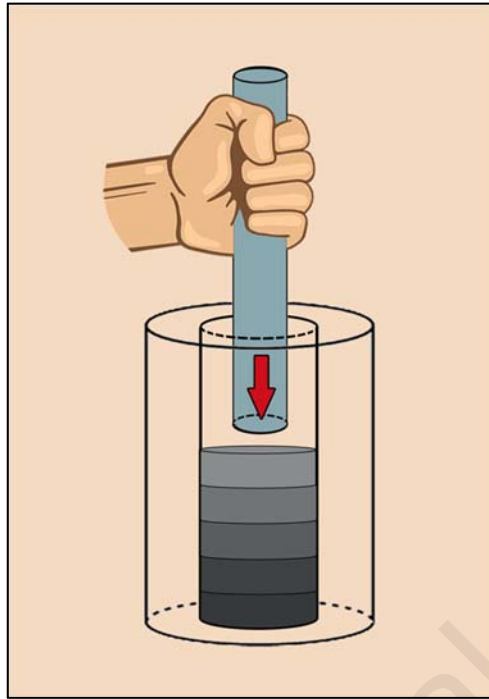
Schematic of the method used to flatten the FGM layers with a gentle pressure using plunger.
